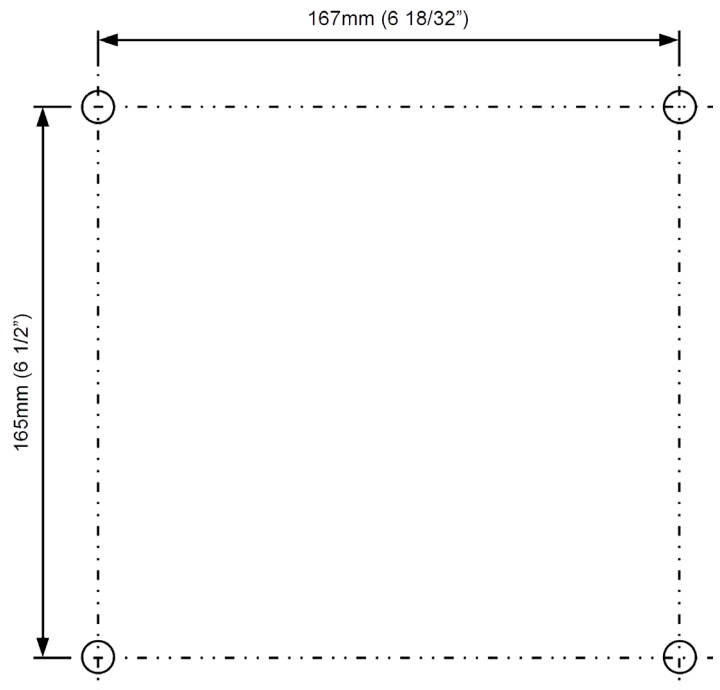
Fixing dimensions for mounting the ProReact EN Analogue Composite Control Unit
